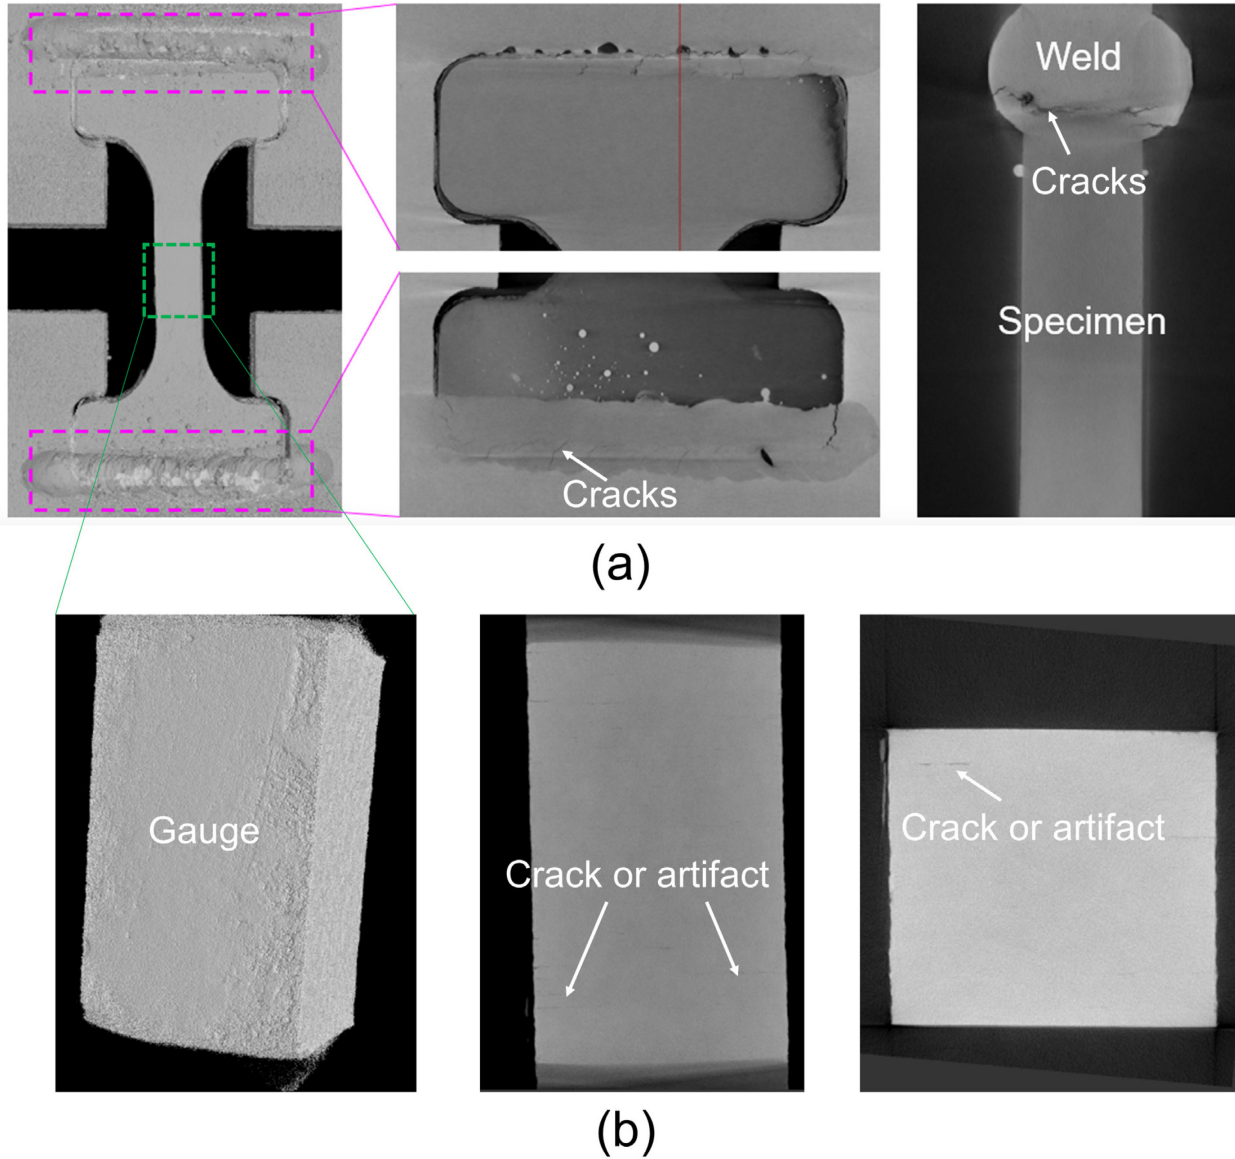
XCT images illustrating the subvolumes of the post-test-to-rupture WSTA (a) near welds with cracks and (b) at the gauge.
